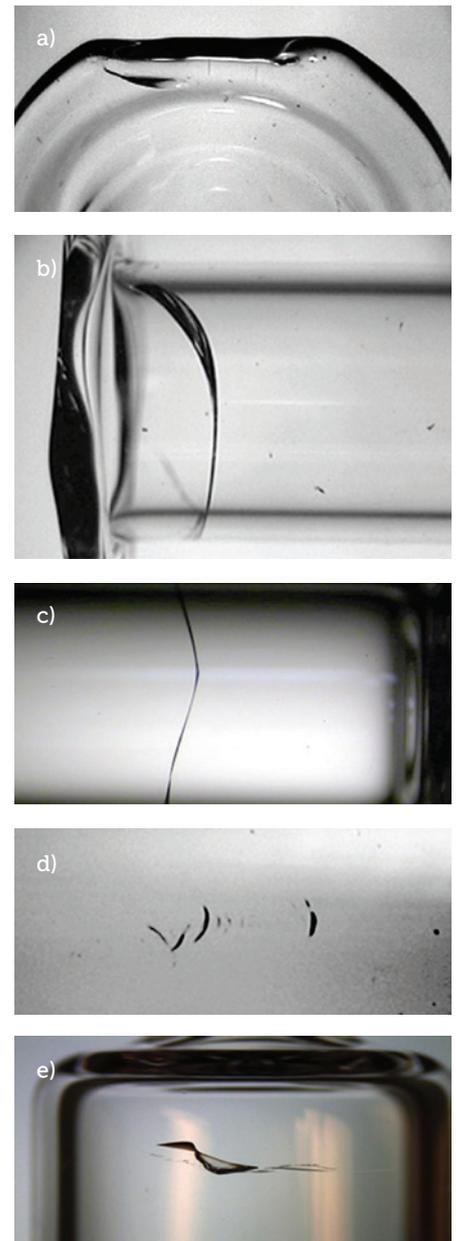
Examples of different types of cracks: a) on the finger flange, b) on the body, c) stress cracks, d) shell (or thermal) cracks, and e) impact cracks.
